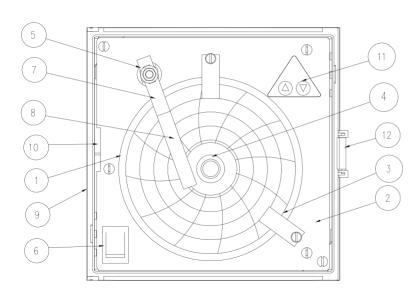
CCR4 ASSEMBLY FRONT VIEW
